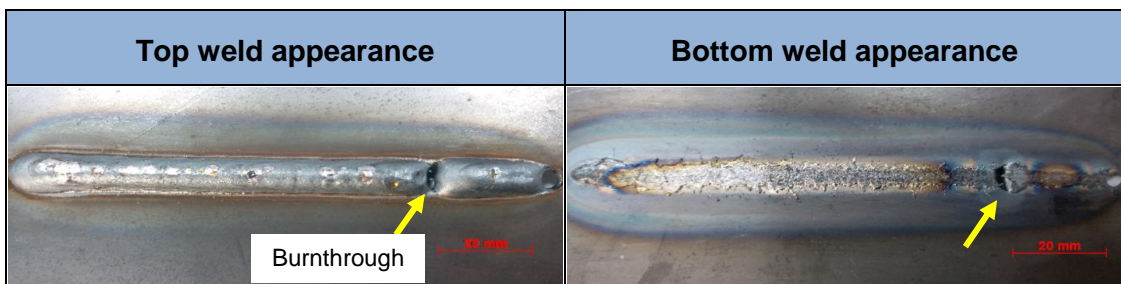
Top and bottom weld appearances of specimen welded at WFS = 9.3 m/min, TS = 0.5 m/min in CMT mode – 2 mm thickness
